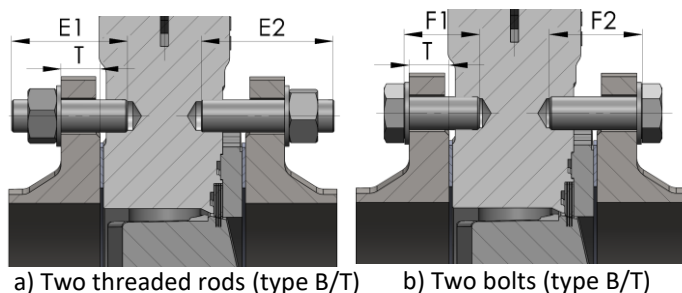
Dimensions of fasteners for valves DN450-600 with type B and T bodies
